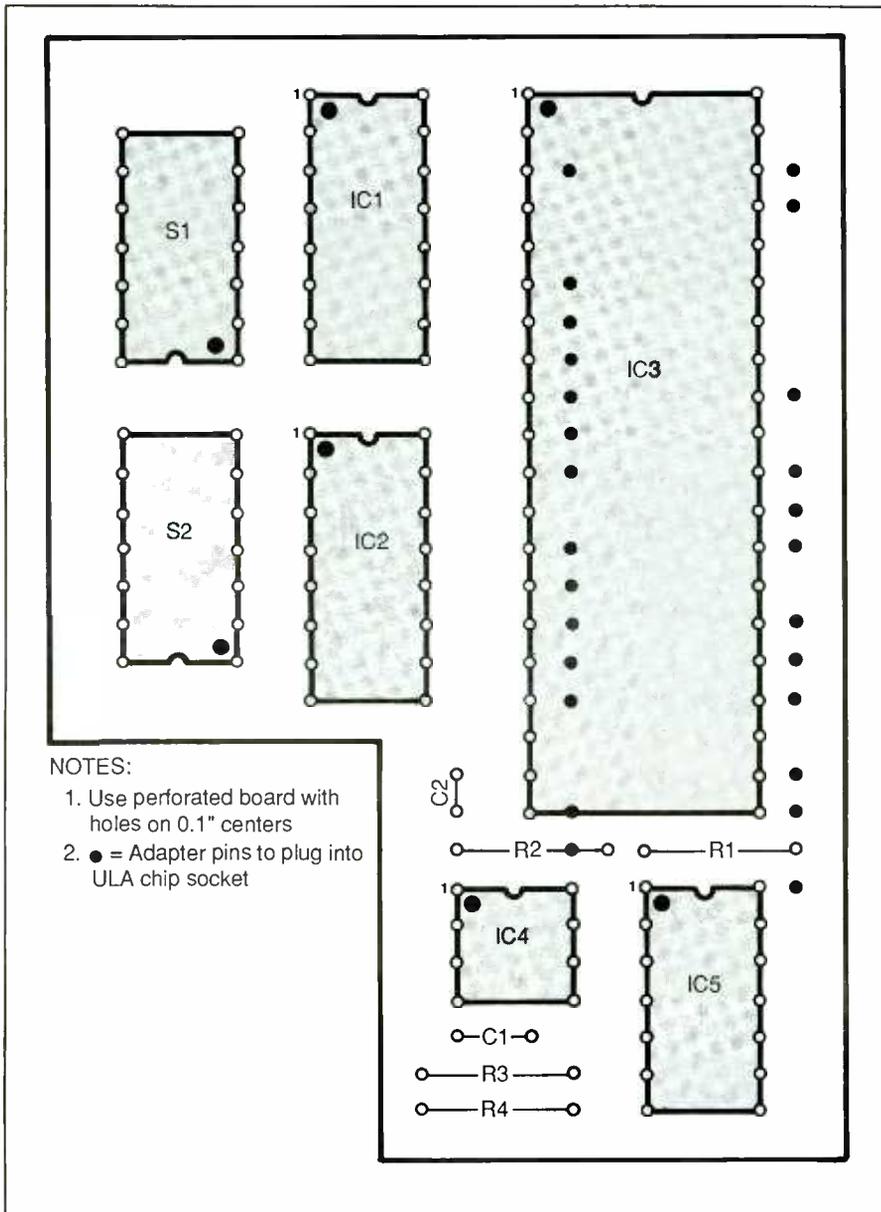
Plug-in circuit-board module size, shape and component layout guide. Use board with holes on 0.1" centers and low-profile sockets with all ICs and for Centronics cable plug-ins. Refer to Fig. 1 for wiring details.
